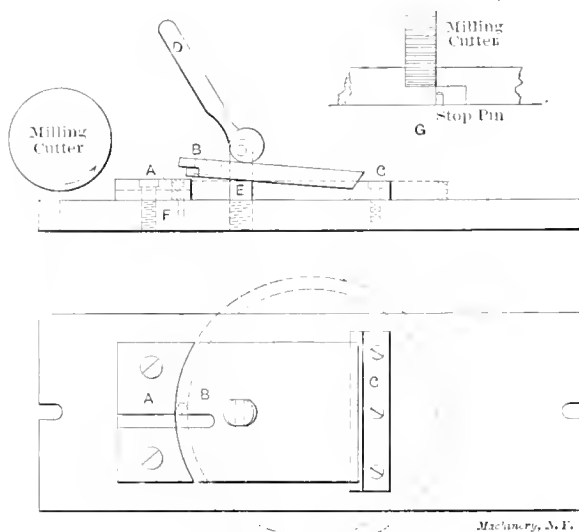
Fixture for Holding the Rings when Milling the Lap Joints.
